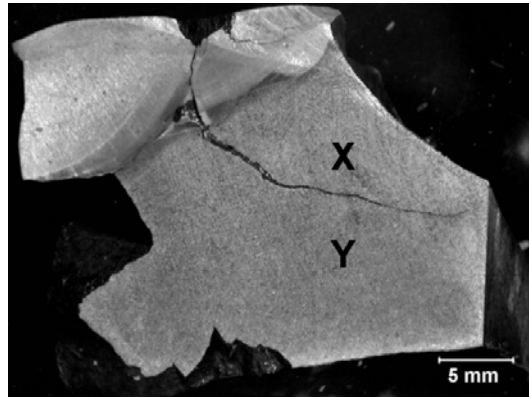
A part of pad welded coal pulverizer pan. Cracks and chipping in the padding weld and blow holes in the weld penetration zone are visible. A large crack penetrates the base material
